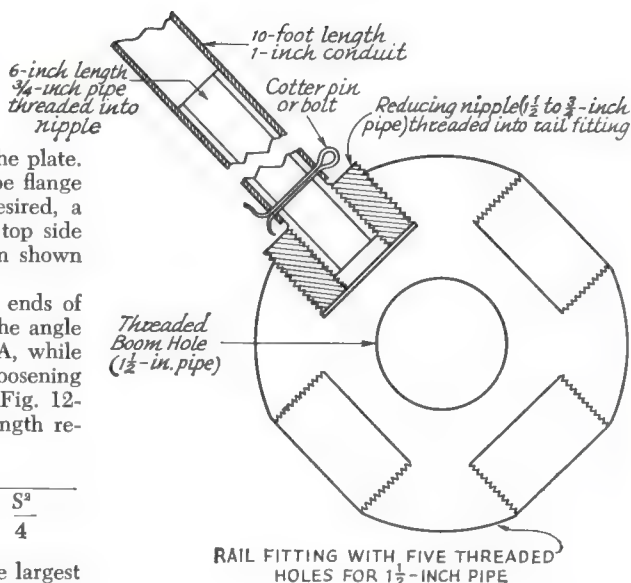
This quad-spreader support makes use of "Kee clamps" of the type used in assembling pipe scaffolding. (KØJTP)
